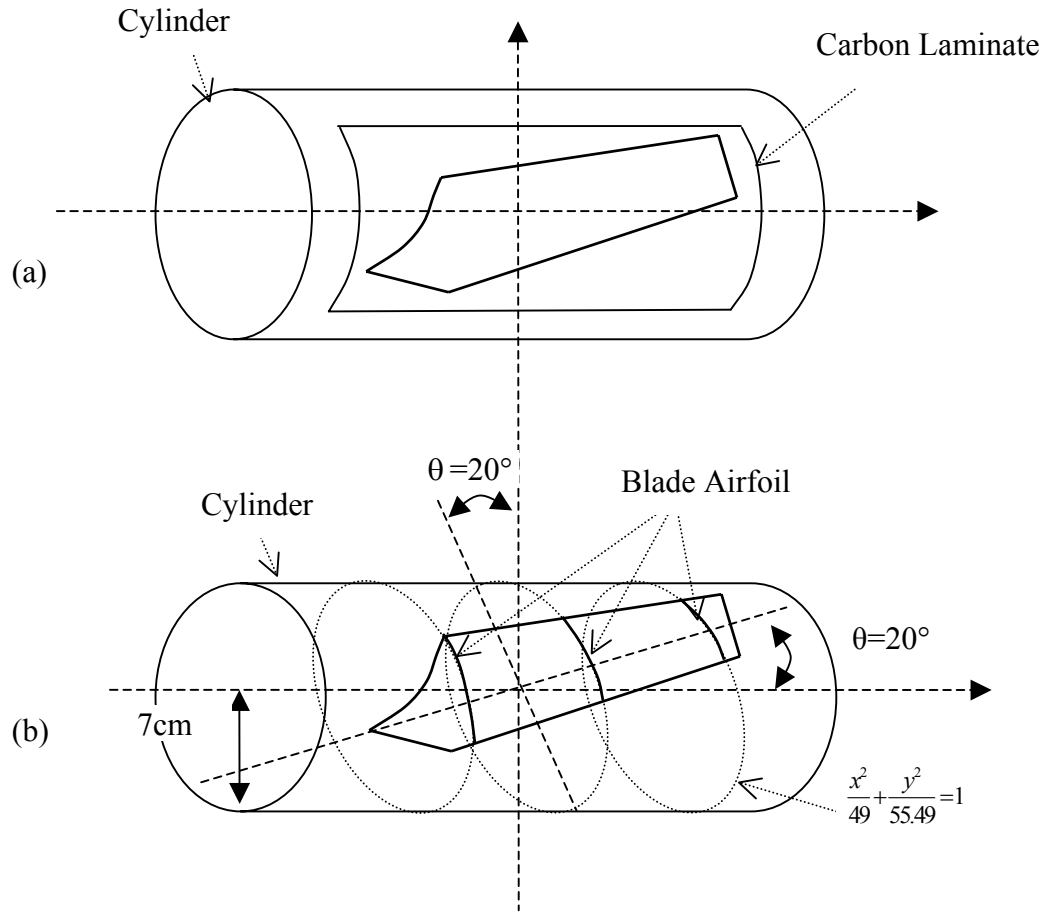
Illustration of the method used for rotor blade fabrication. (a) Carbon laminates on the cylinder. (b) Blade airfoil geometry.
